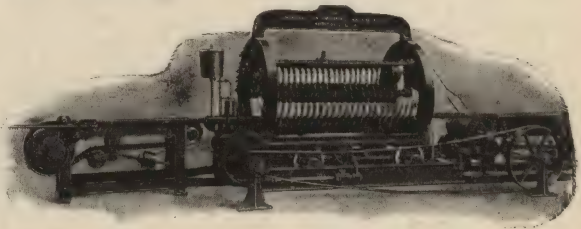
A Stiff-Mud Brick Cutting Machine.
